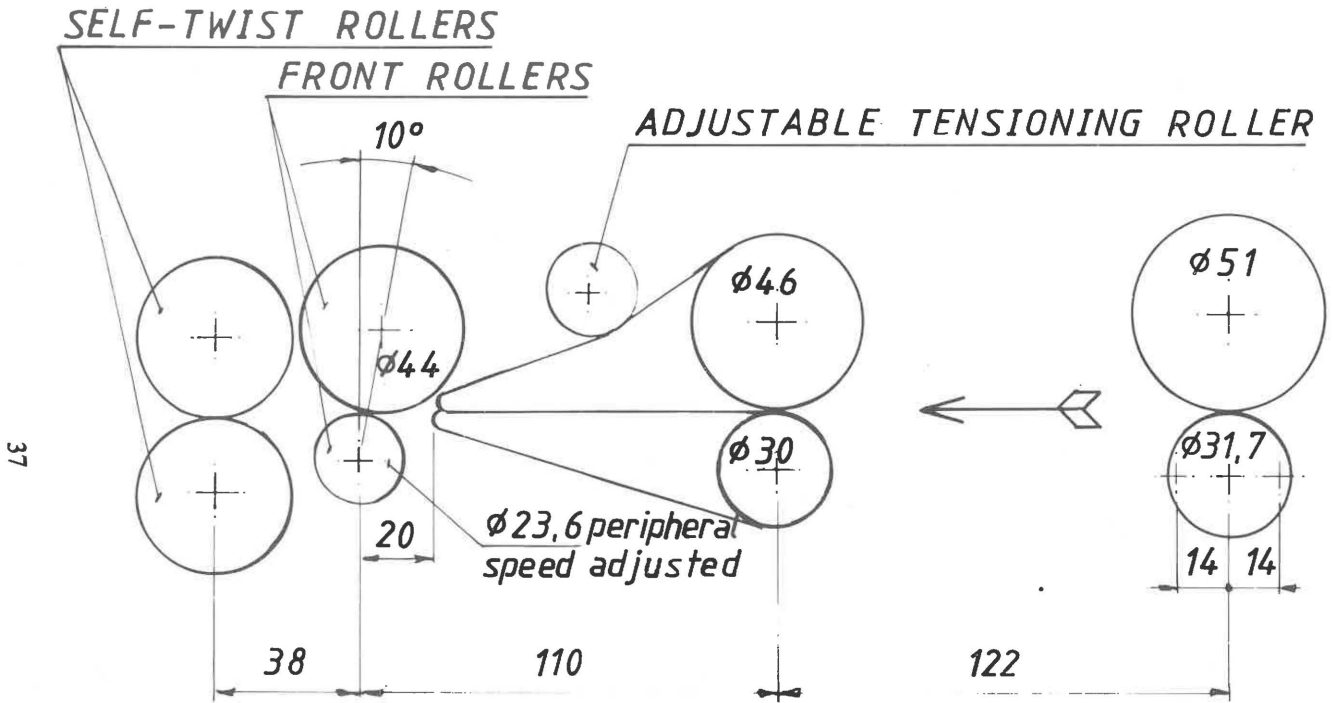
DRAFTING & SELF-TWIST ASSEMBLY ZONE
